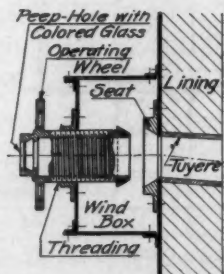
A SECOND TYPE OF ADJUSTABLE TUYERE ARRANGEMENT.
